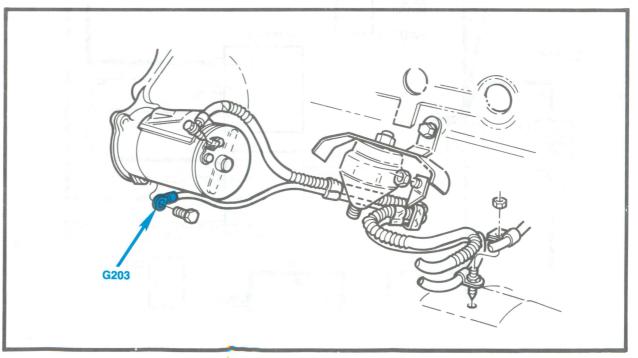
Lower RH Side of Engine (4.9L 6 Cyl. ONLY)
